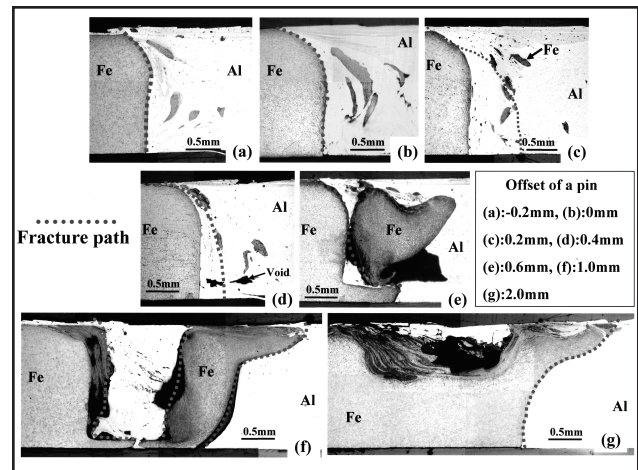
Effects of pin offset on the microstructures and fracture paths of welds.
